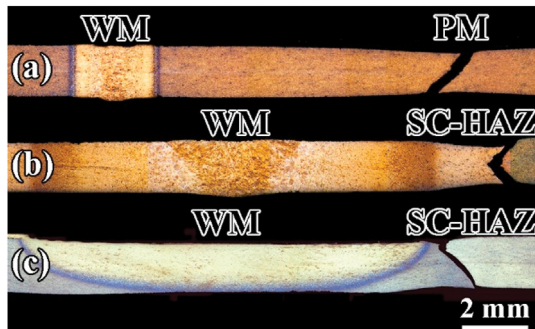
Cross-sectional images of (a) LW, (b) TIG welding and (c) FSW joints after tensile tests.
